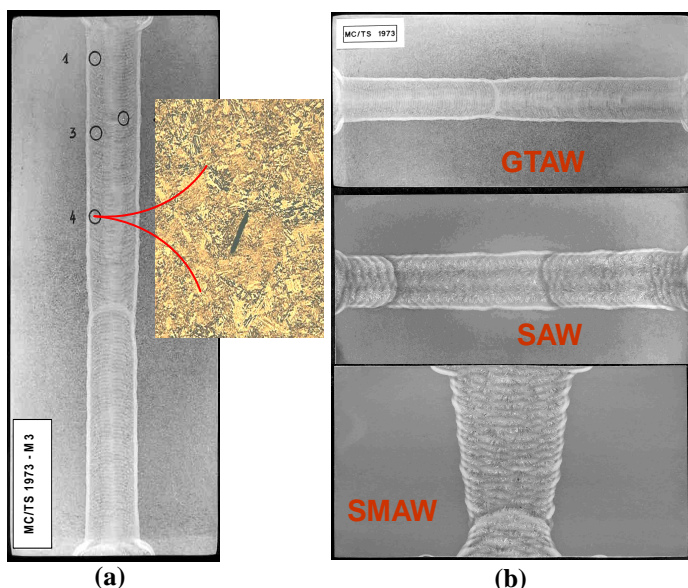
Mod. 9Cr1Mo thick welding: (a) initial GTAW test with hot cracking (<0.3 mm); (b) optimised welds
